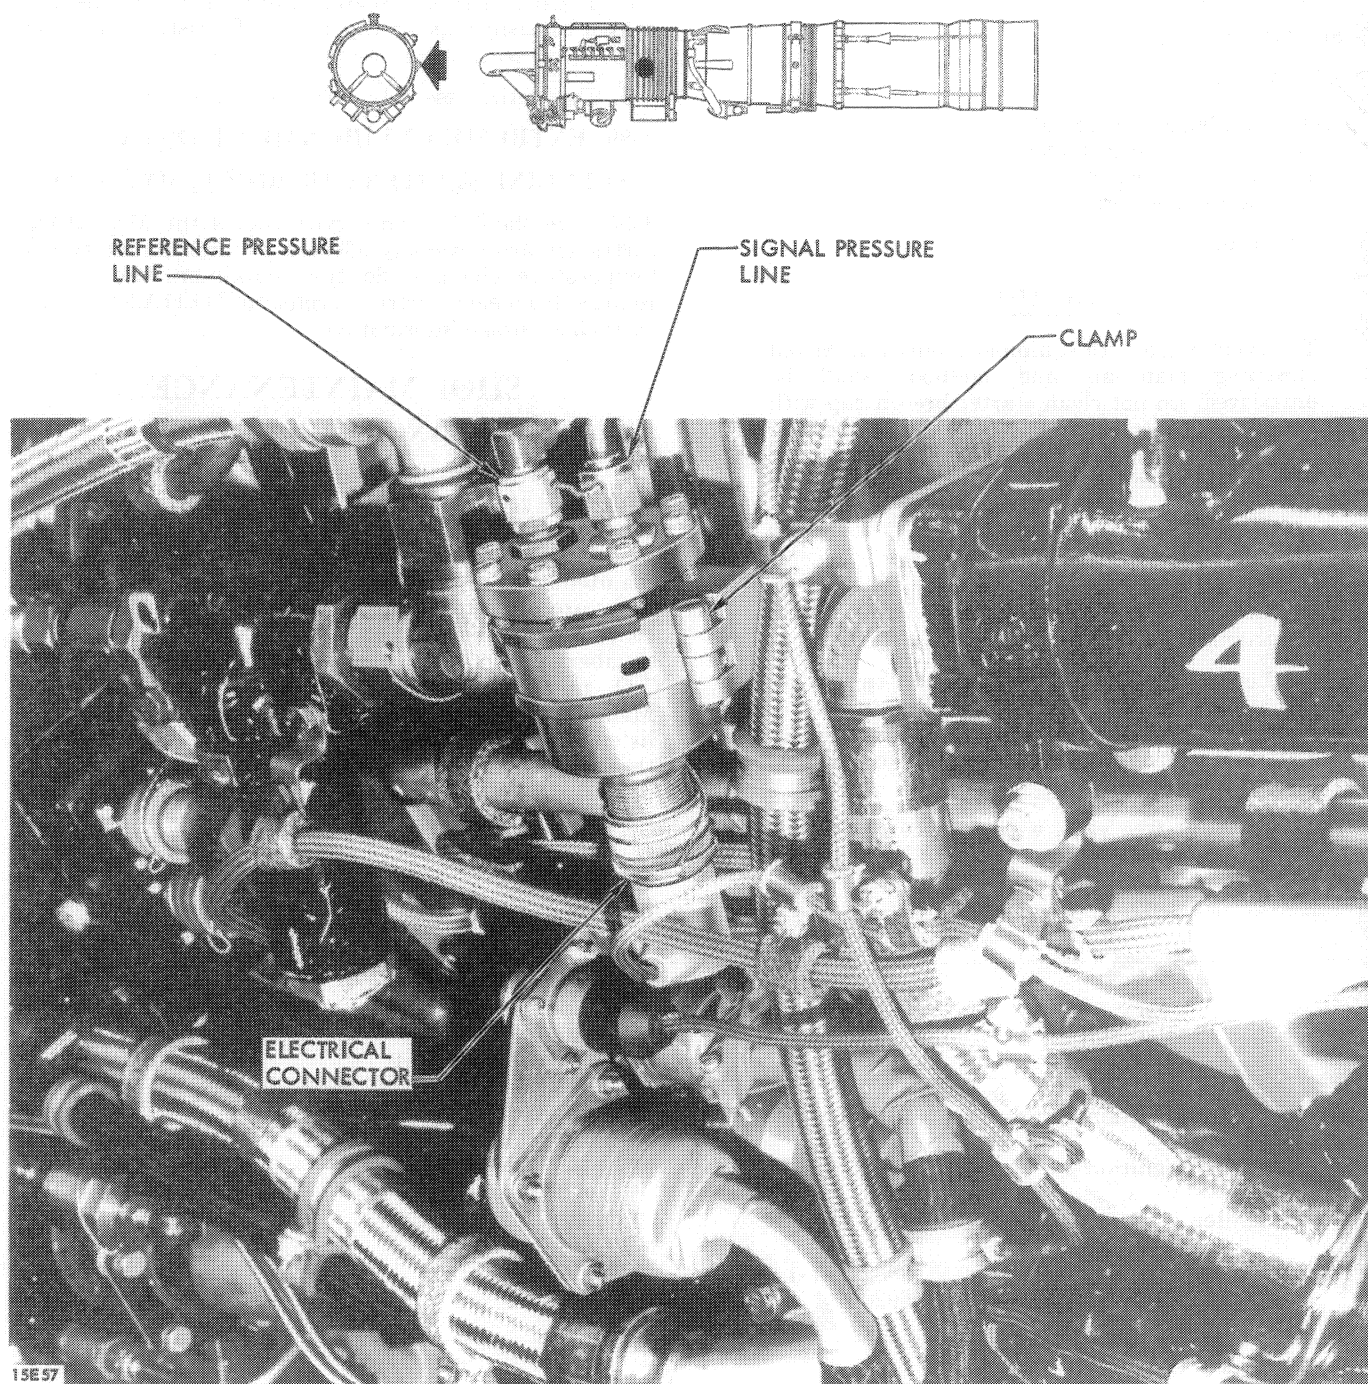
Afterburner Ignition Switch Removal and Installation
